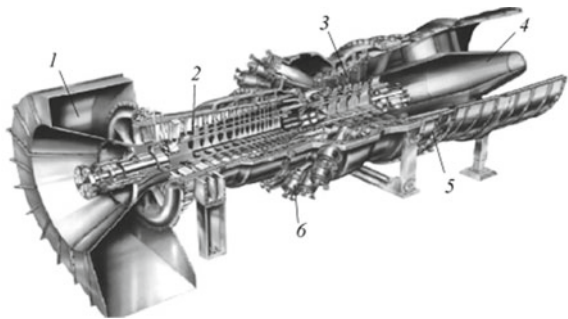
SGT-800 “Siemens AG” with a knee-shaped inlet casing [2]. 1—output shaft; 2—inlet casing; 3—compressor; 4—combustion chamber; 5—turbine; 6—exhaust casing
